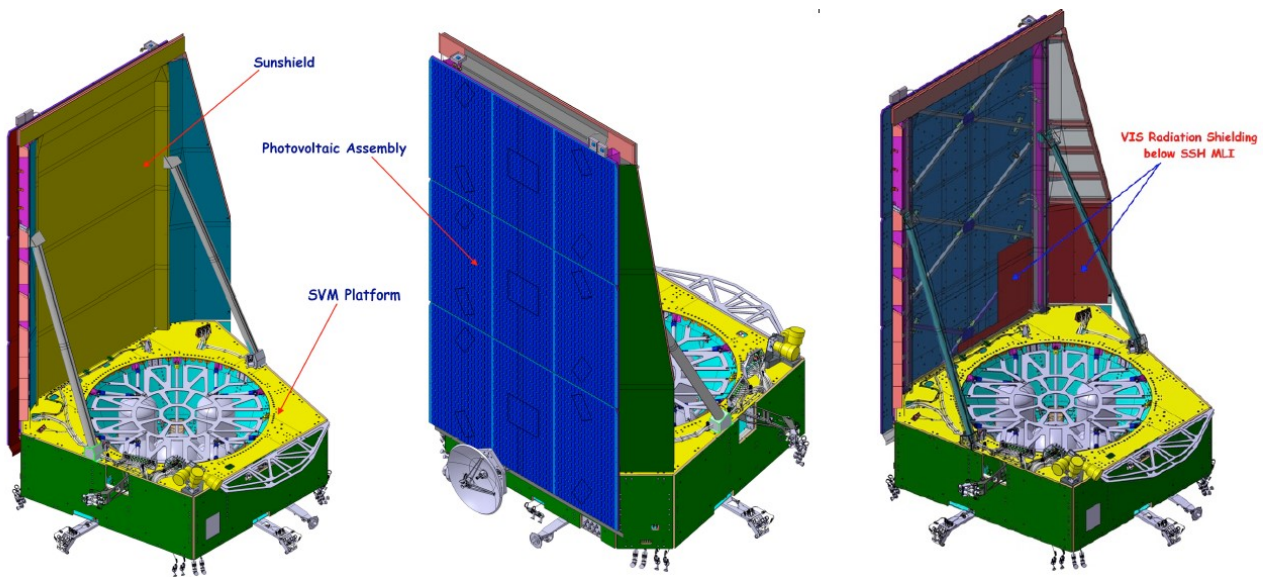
Overview of the Euclid SVM with Sunshield module supporting photovoltaic assembly.
